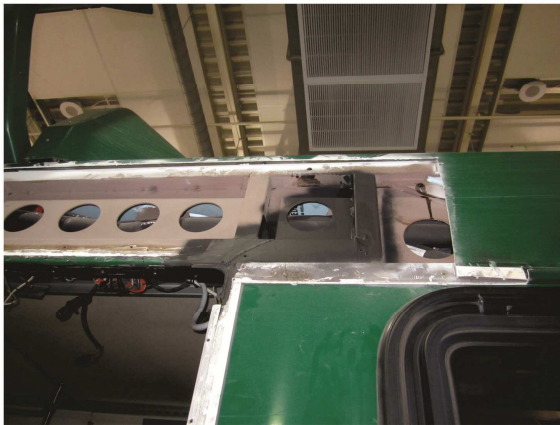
SHOWN SECTION OF DRIP RAIL REMOVED.
